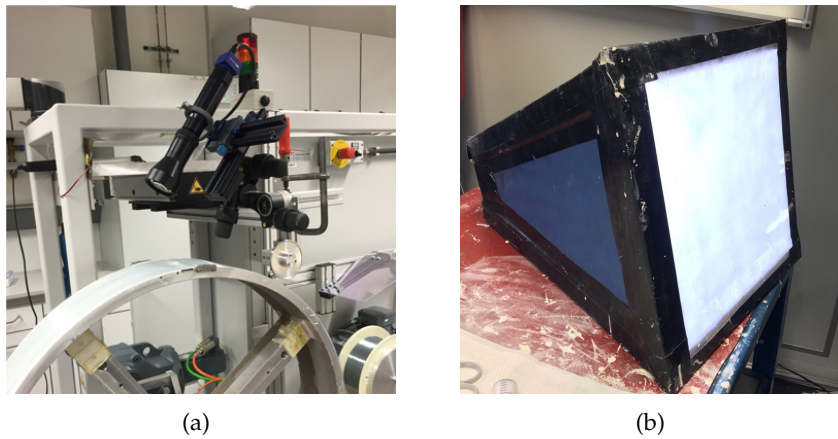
(a) Camera mounting on the serial production machine, realised with the help of a special camera mounting and several macro slides. (b) Softbox, which diffuses the light to get a reliable exposure and good camera feed.
